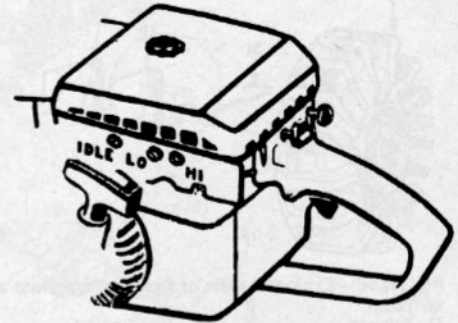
View showing carburetor adjustment points for early model S1050 Automatic and S1130G. Refer to exploded view in Fig. HL53 for view showing idle adjusting screw (5), spring (6), and intake manifold (9).
